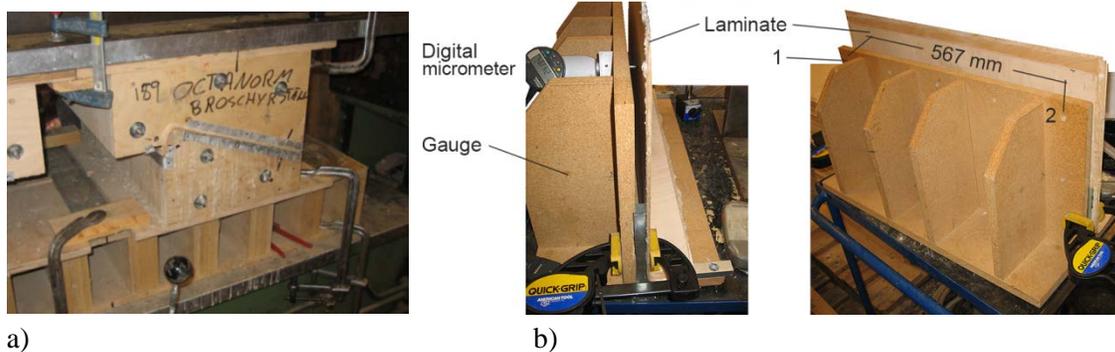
Moulding and measurement of twist of a laminate: a) pressing tool in which the laminates were moulded, and b) determination of twist for a laminate (left) and the measurement locations on the gauge (1 and 2) where the distance between the gauge and the laminate was measured with the help of a digital micrometer.
